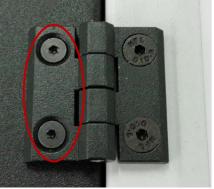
Unscrew the 4 DIN7991-M5x12 screws fixing the top cover to the printer.
